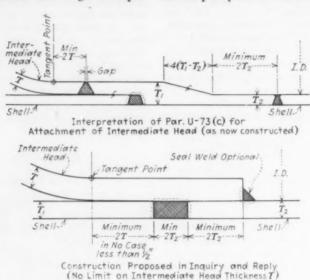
INTERMEDIATE DISHED AND FLANGED HEADS
